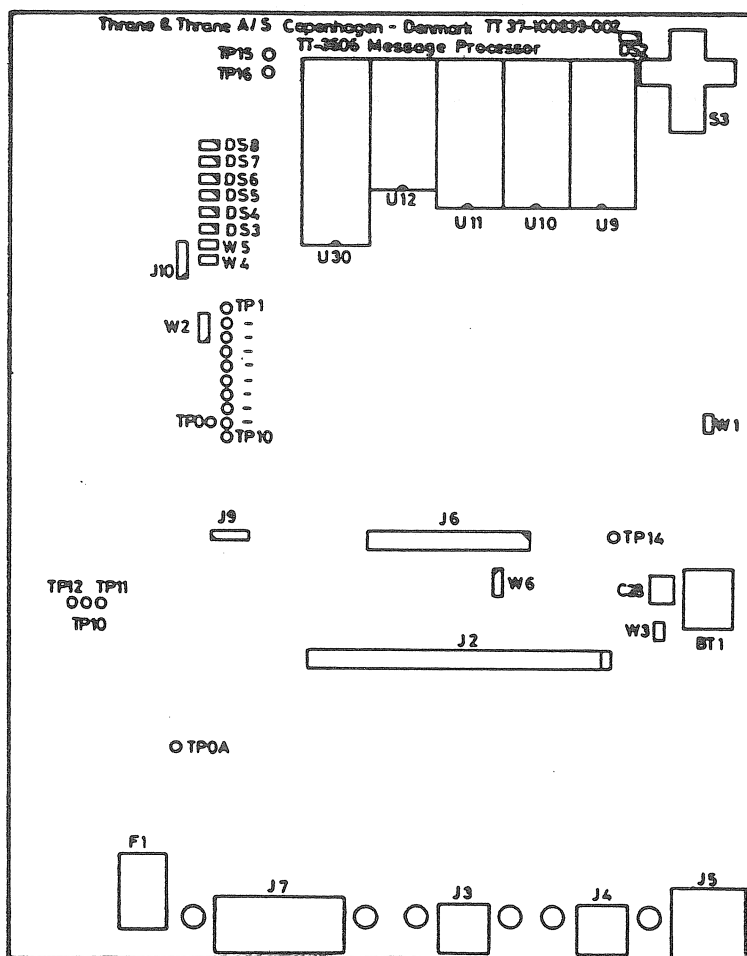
Jumper/adjustment locations on TT-3606A PCB.
